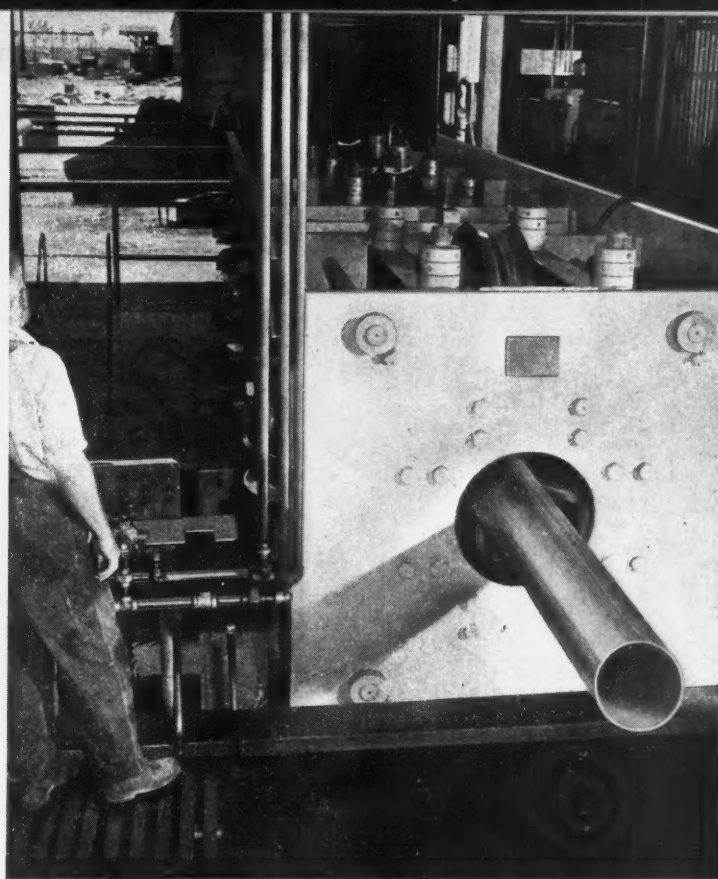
Special machine equipped with a long boom for welding large-diameter pipe on the inside by means of the submerged-arc method
